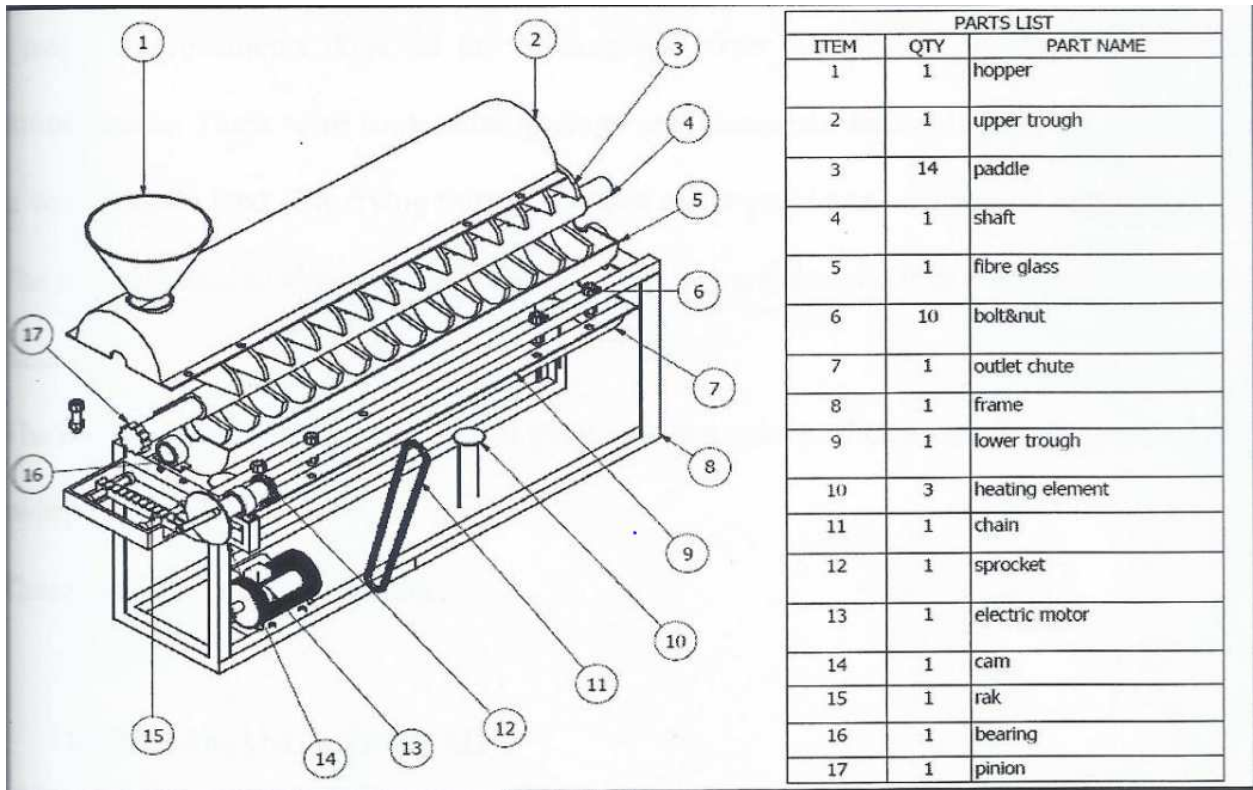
Exploded View of the Gari Fryer Showing the Component Parts
